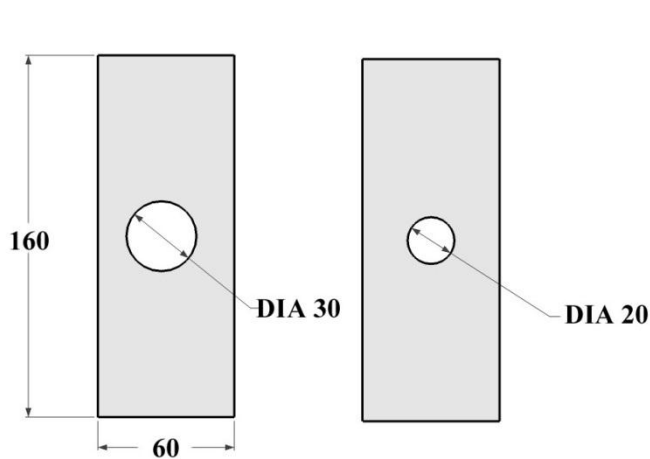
Geometry of plates with a hole, where all dimensions are in millimeters.
